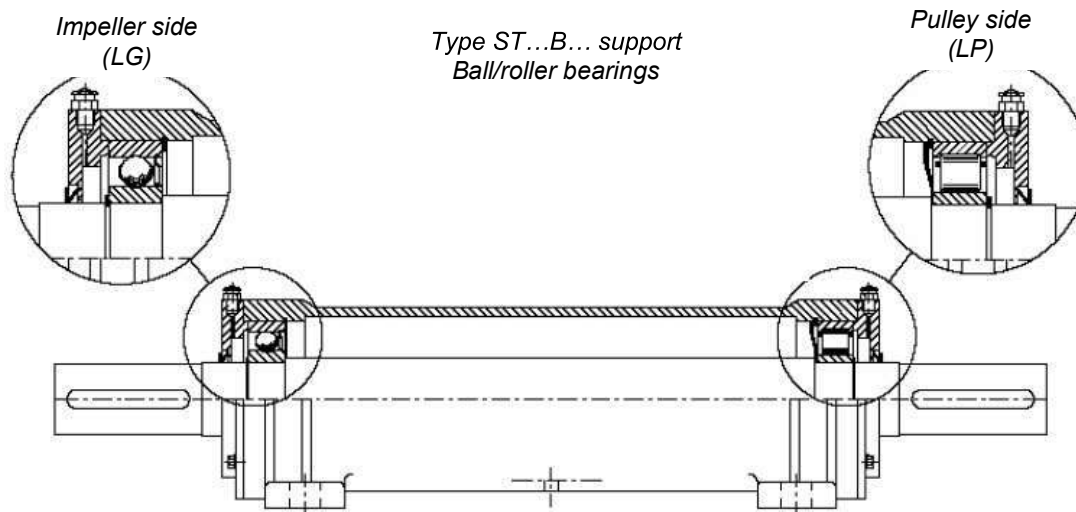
ST...B... one-piece support with radial ball bearings on impeller side and roller bearings on transmission side
